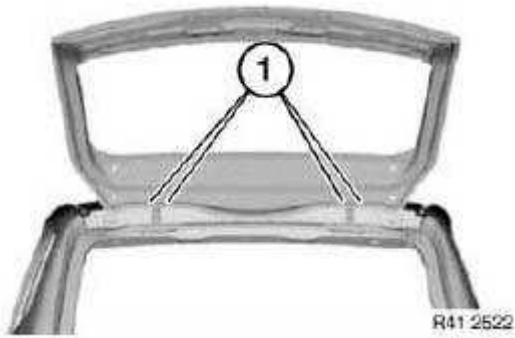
Screws On Rear Lid Hinge To Rear Lid
